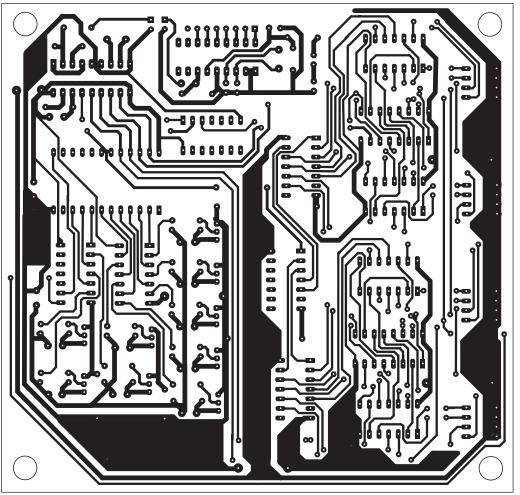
Actual-size, single-side PCB for the circuit in Fig. 2
